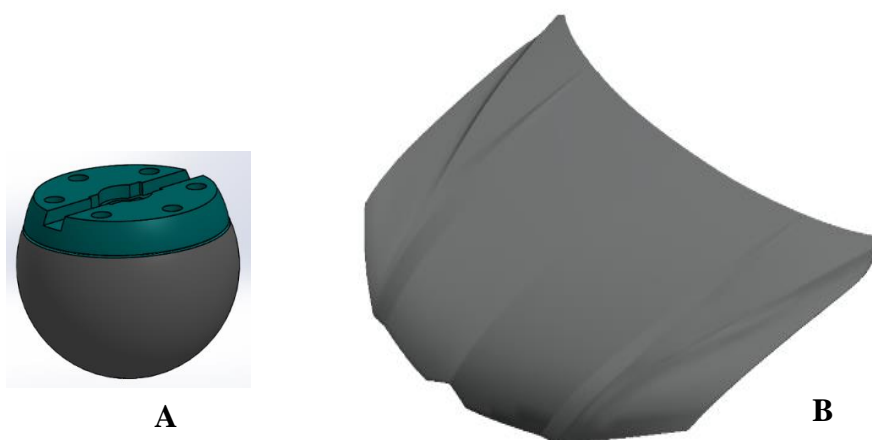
6 Three-Dimensional View of Head Form Impactor (A) and Car Bonnet (B)
